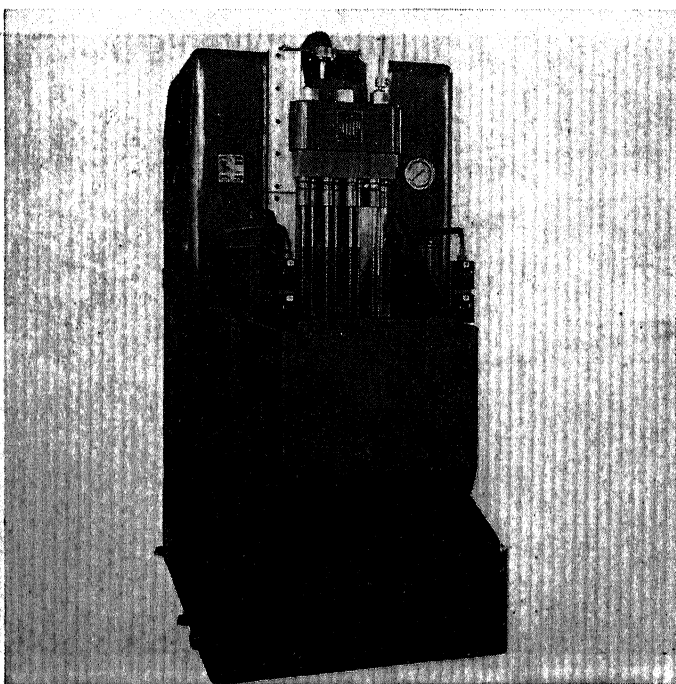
Hydraulic broaching machine of sturdy, streamlined arc welded steel construction.
